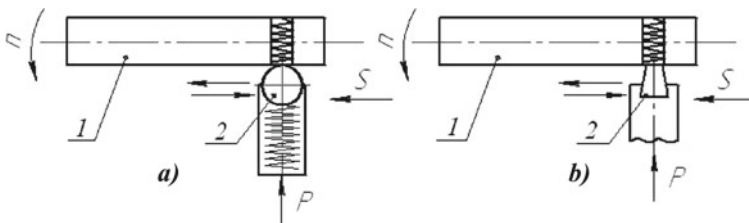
Vibration-assisted burnishing: a vibration-assisted roller burnishing; b vibration-assisted polishing; 1—workpiece; 2—tool (hardened ball, diamond burnisher)
